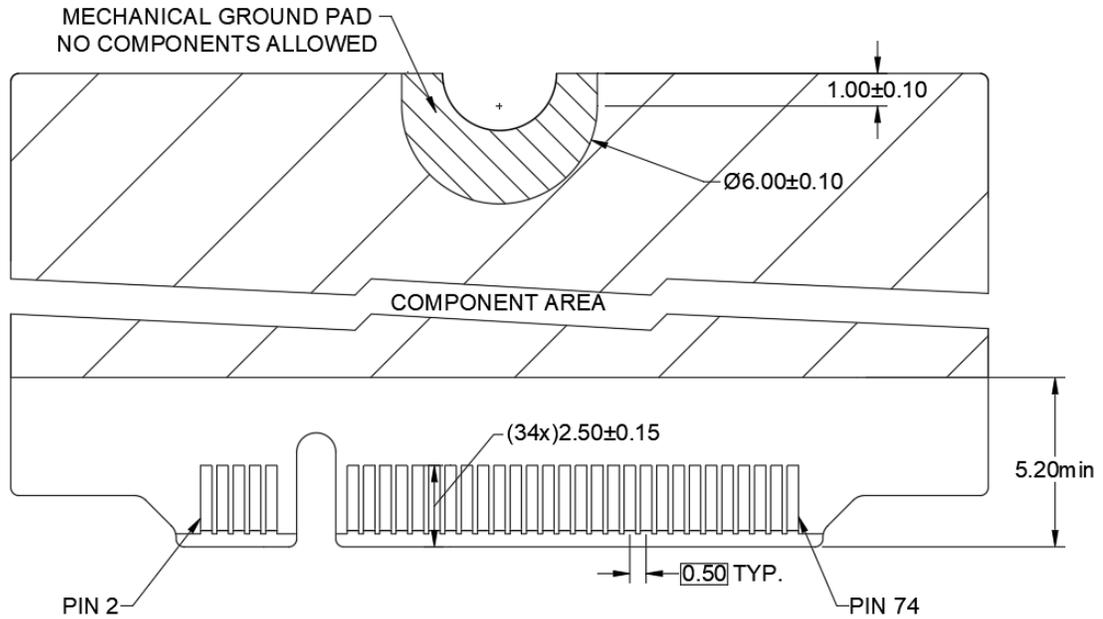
M.2-30XXX-XX-X-1A(A, B, C, D) Card Edge Outline Bottom-side
